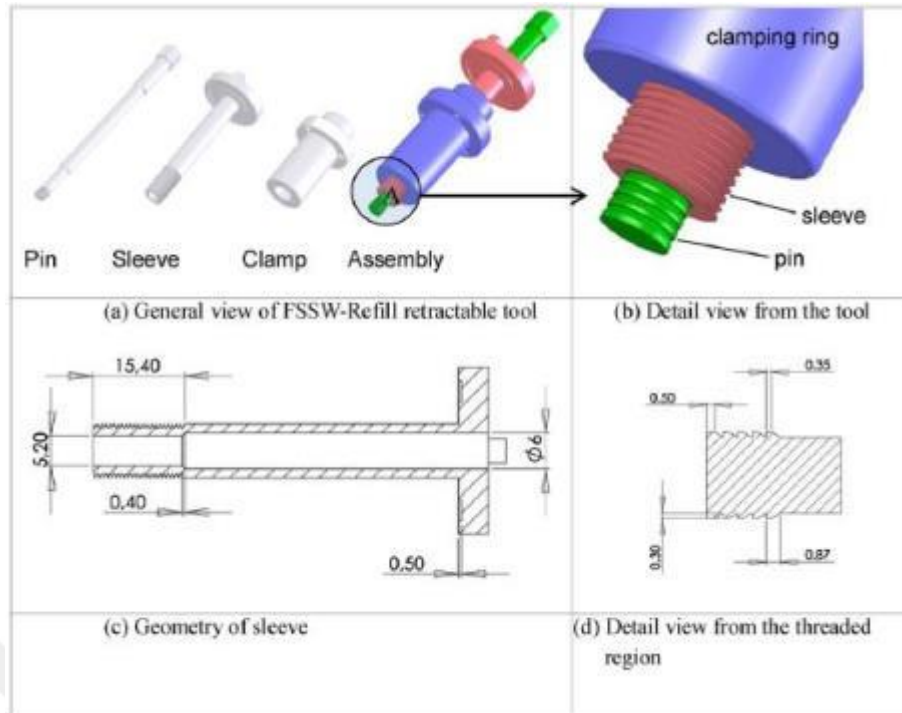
Schematic illustration of the three-piece retractable tool system in refill FSSW
